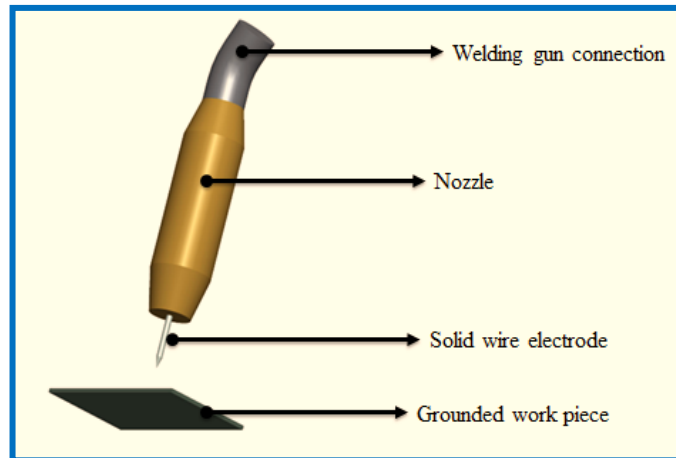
Illustration of a layout of GMAW welding grounded work piece, bare electrode, gas nozzle and welding gun connection.
